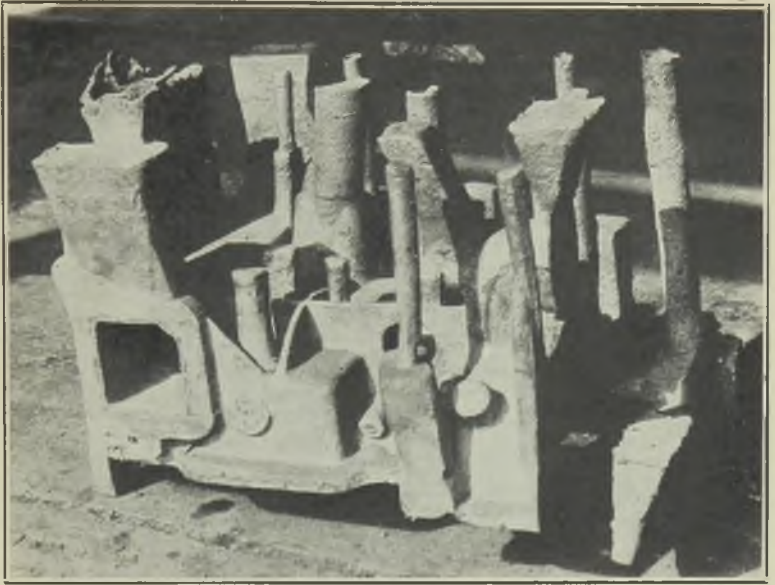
FEEDING ARRANGEMENTS FOR GEAR-CASE CASTING.
